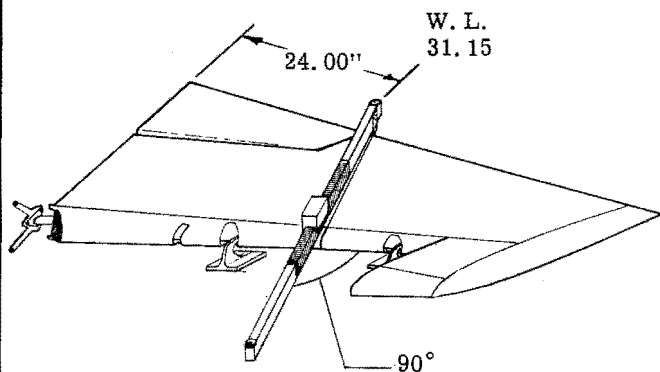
Balancing Fixture Fabrication. (Sheet 2 of 2)
